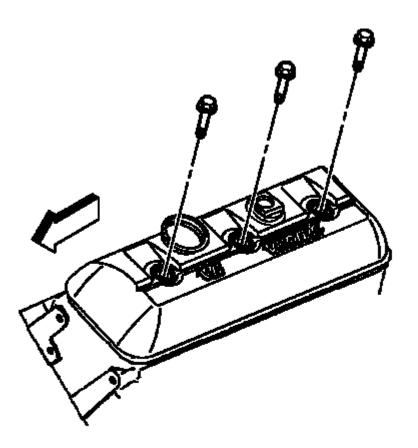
View Of Valve Rocker Arm Cover Bolts (Left) Courtesy of GENERAL MOTORS CORP.
